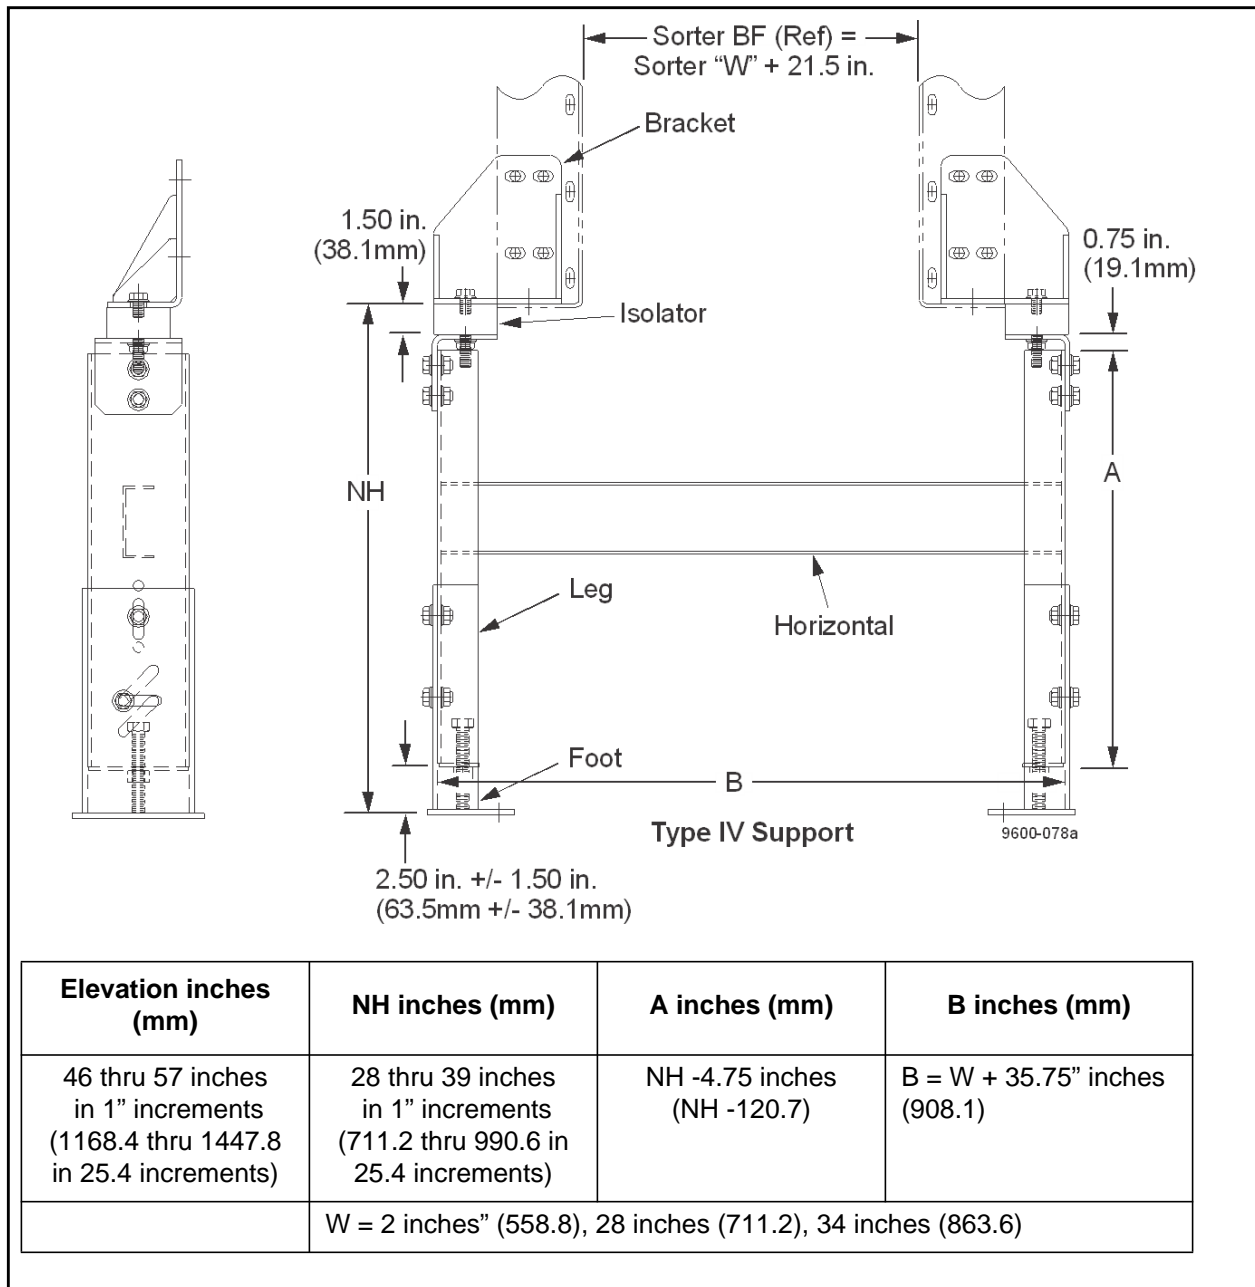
11 Type IV Floor Supports - with 2 Horizontal Braces - Drive Section
